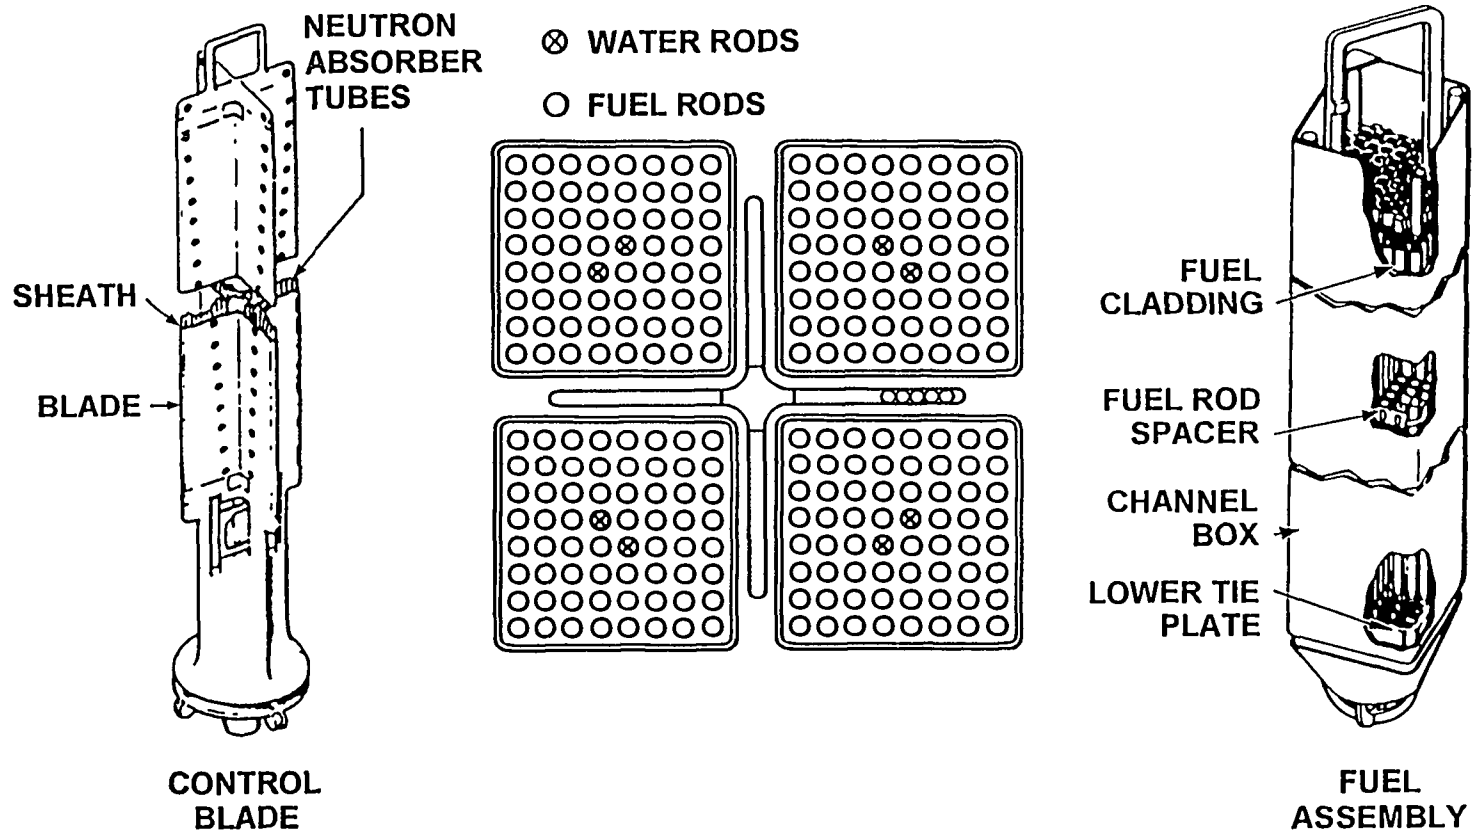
Sketch of typical BWR control blade and fuel assembly.
